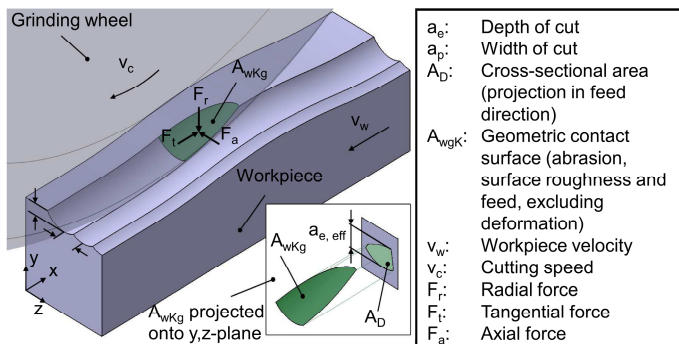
Different parameters of NC-shape grinding with a toroid grinding wheel [2]
